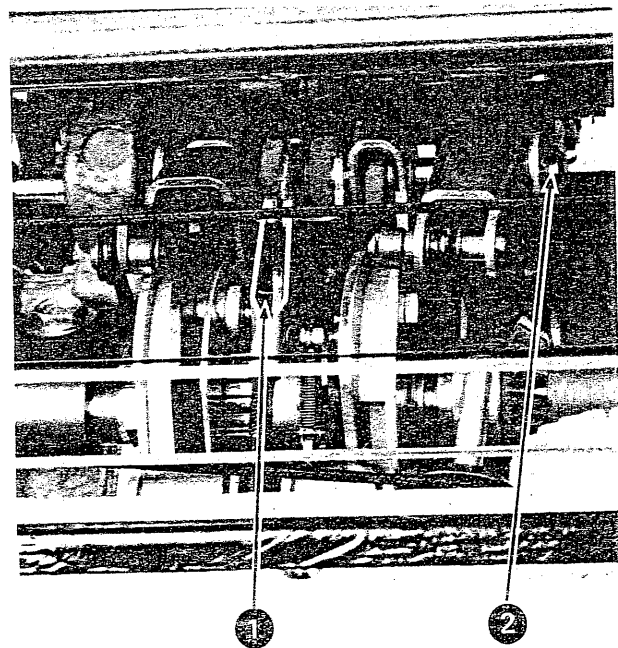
Operational-Cam-Check-Pawl and Escapement-Cam-Follower Removal
